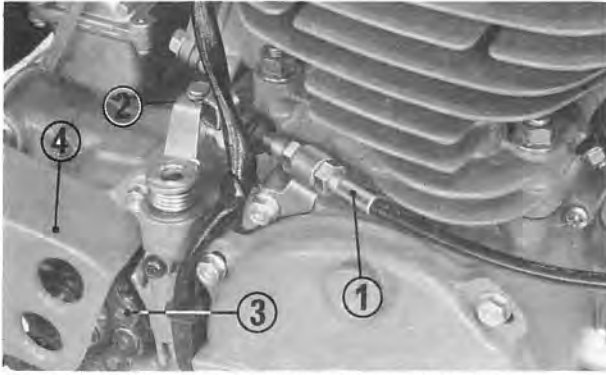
(1) Clutch cable (2) Clutch lever (3) Drive chain
